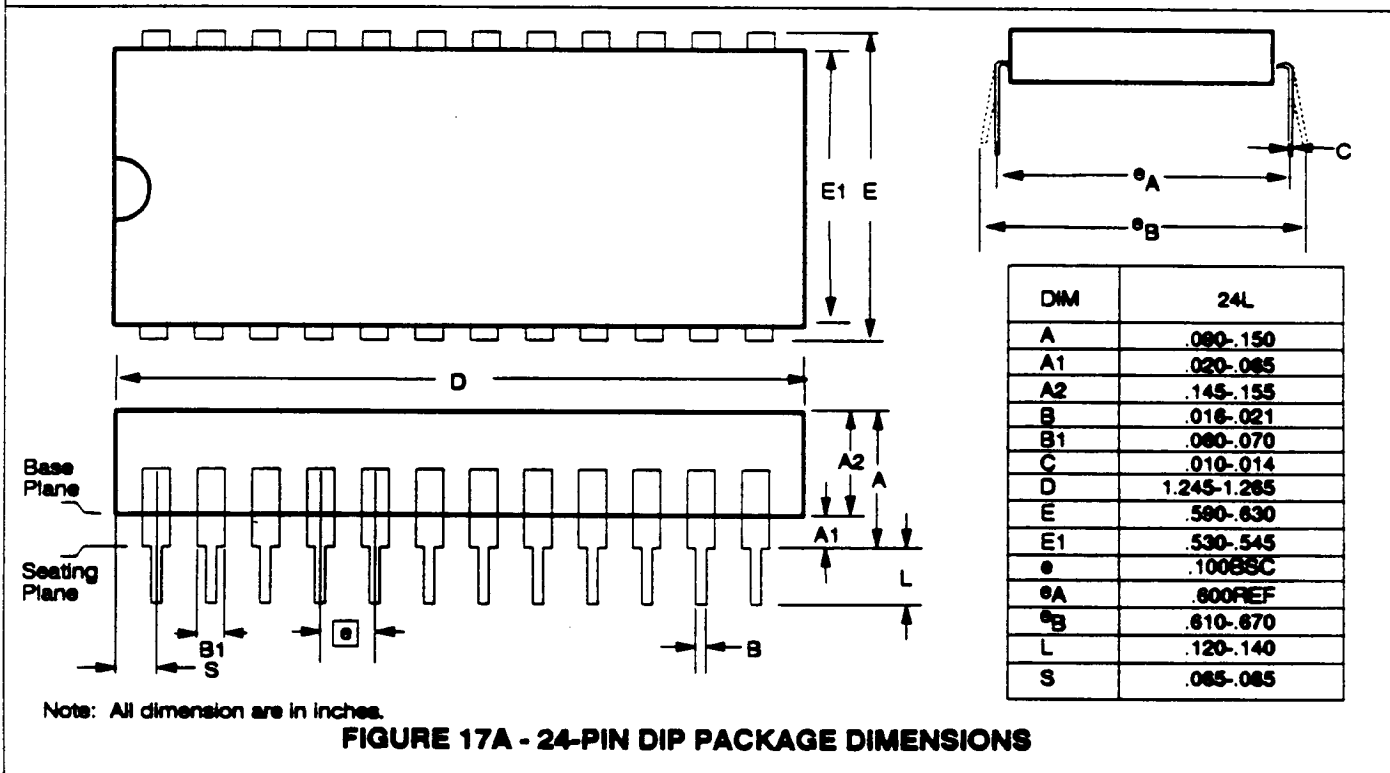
A - 24-PIN DIP PACKAGE DIMENSIONS
